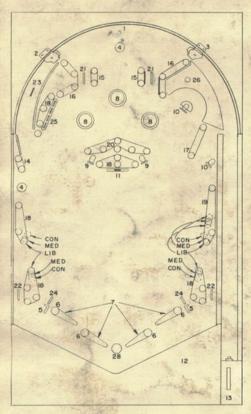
CONTACT Spare Parts Identification and Post Adjustment Details
